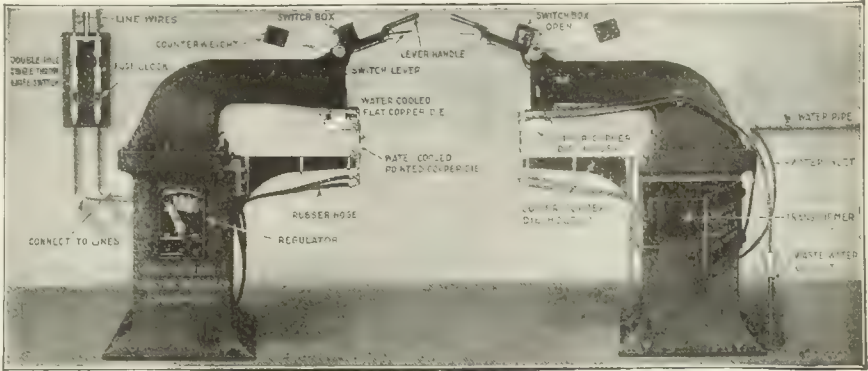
Diagram Showing Different Parts of Toledo Electric Welder.
